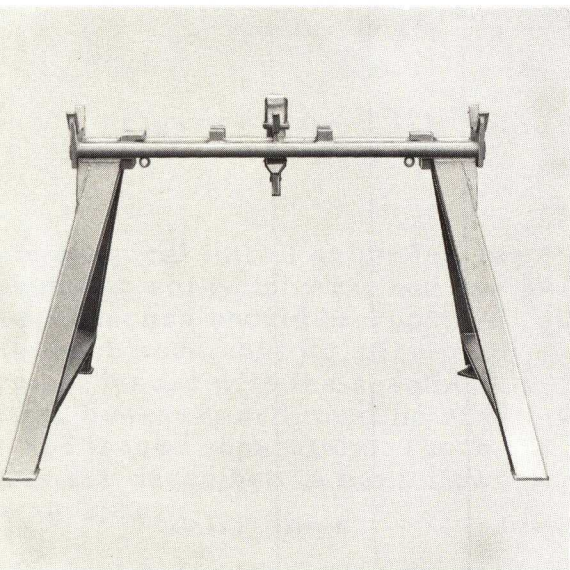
SIDEWINDER Assembly Stand Set Up for Use.
